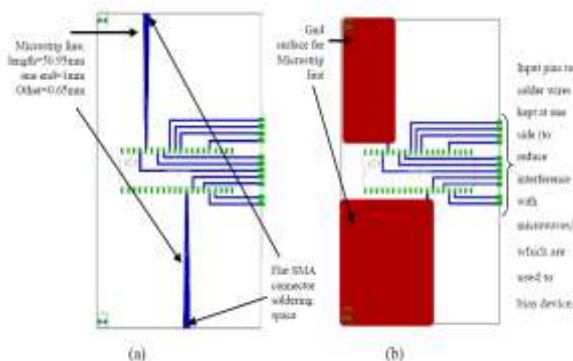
PCB design final mask provided to automatic PCB designing machine (a) back side where IC pins and wires will be soldered (b) back side where red surface (Cu)
